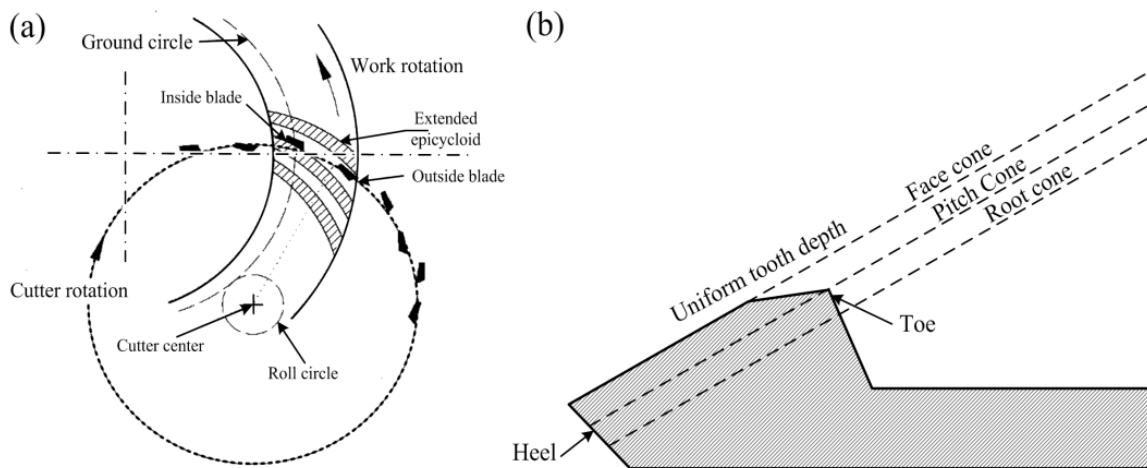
Face hobbing, (a) tooth curvature [1], (b) uniform tooth depth.
